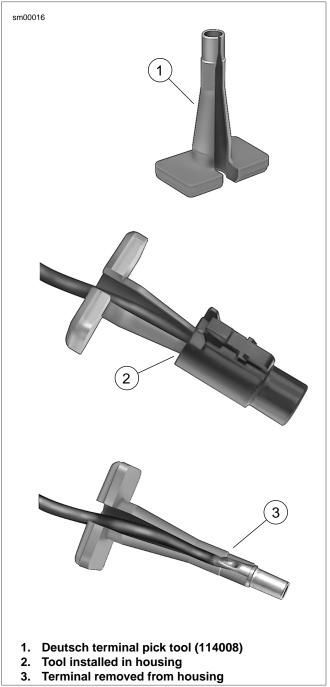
Deutsch 1-Place Connector: Remove Socket/Pin Housing
